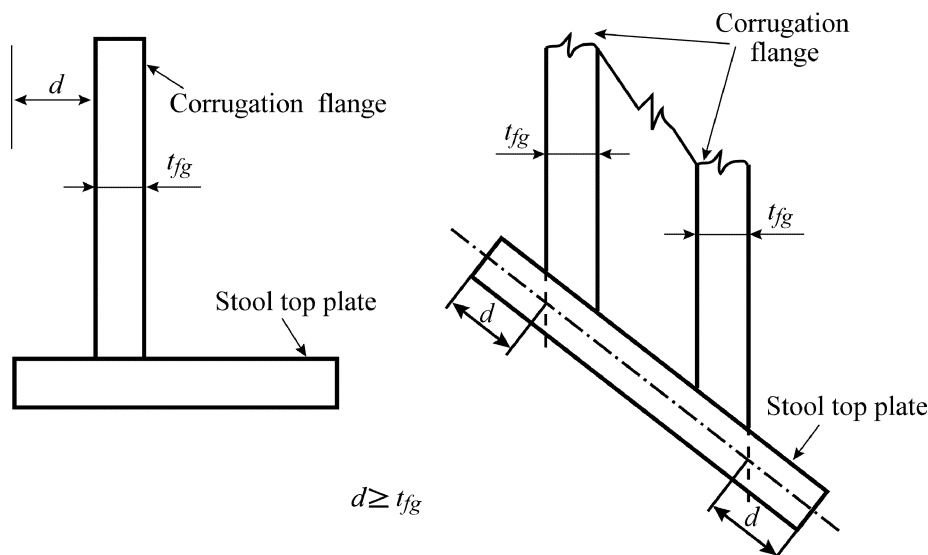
Permitted distance, d , from the edge of the stool top plate to the surface of the corrugation flange
